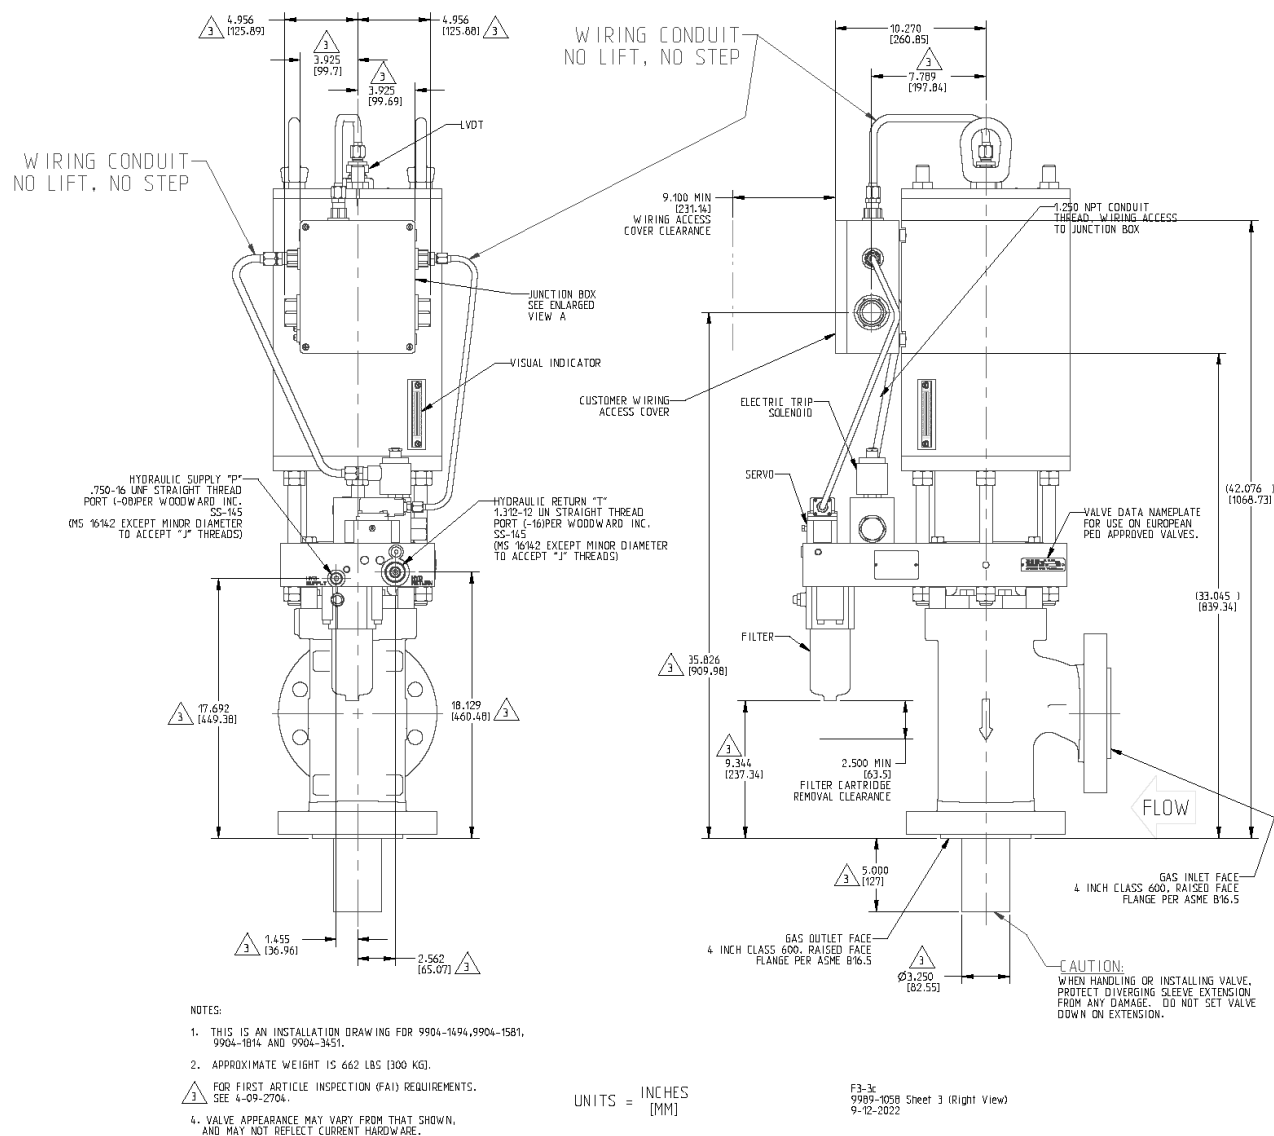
Outline Drawing 4" High Recovery Control Valve (Right View)
